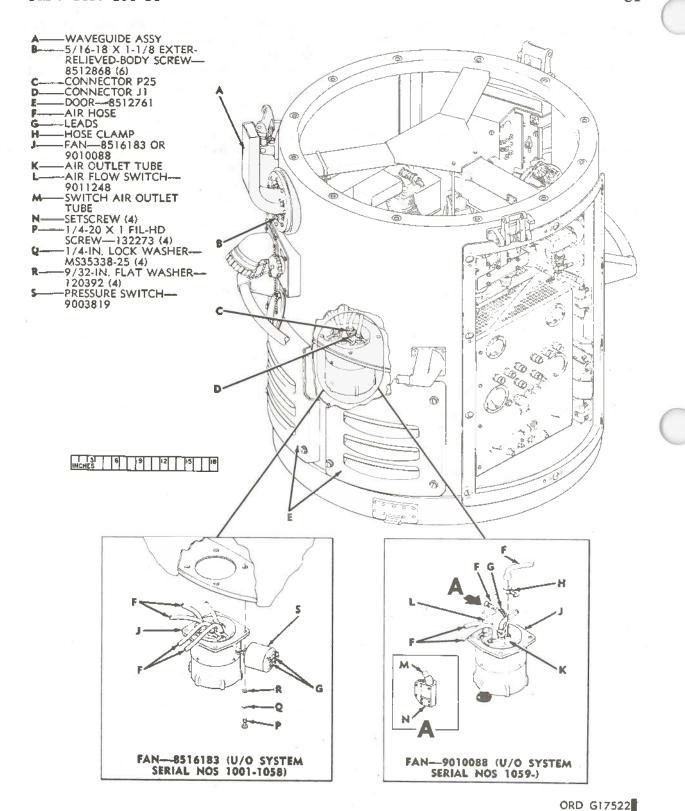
Removal and installation of fan - 8516183 or 9010088.
